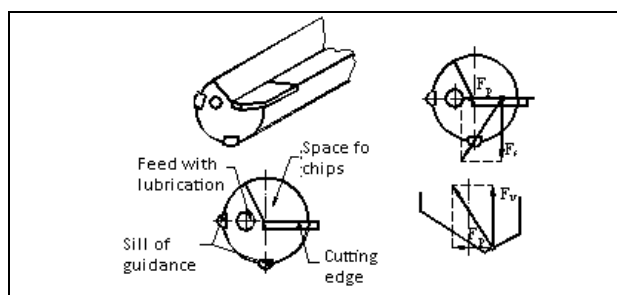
Head and pipe of single-edge drill with outside exhausted of chips
